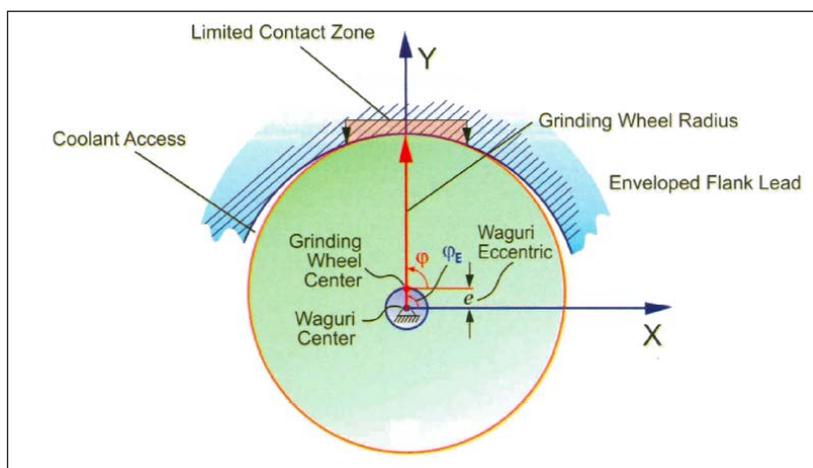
Waguri eccentric principle with coolant access and limited wheel contact.
